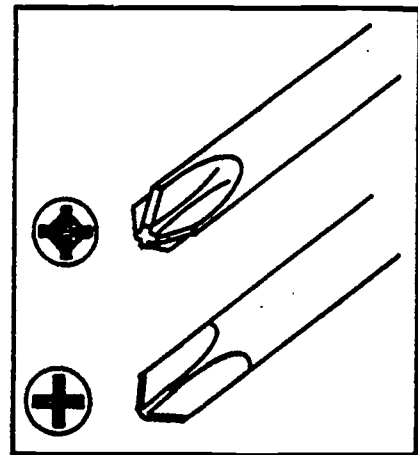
The Reed & Prince screw head and its matching screwdriver (bottom) somewhat resembles the Phillips type (top), but there is a difference. The slots in a Phillips screw end in a slight curve at their intersection, unlike the Reed & Prince screw, whose slots meet at an exact right angle. (The Hand Tool Institute)
